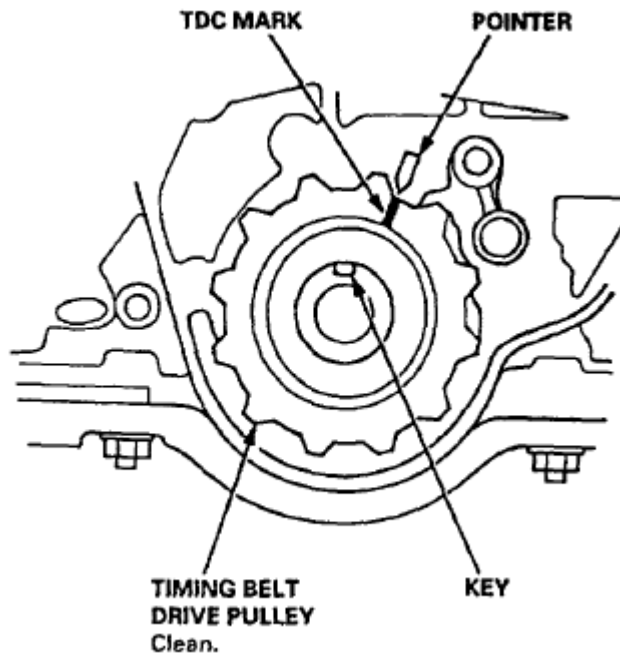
Identifying TDC Mark, Pointer, Key And Timing Belt Drive Pulley
